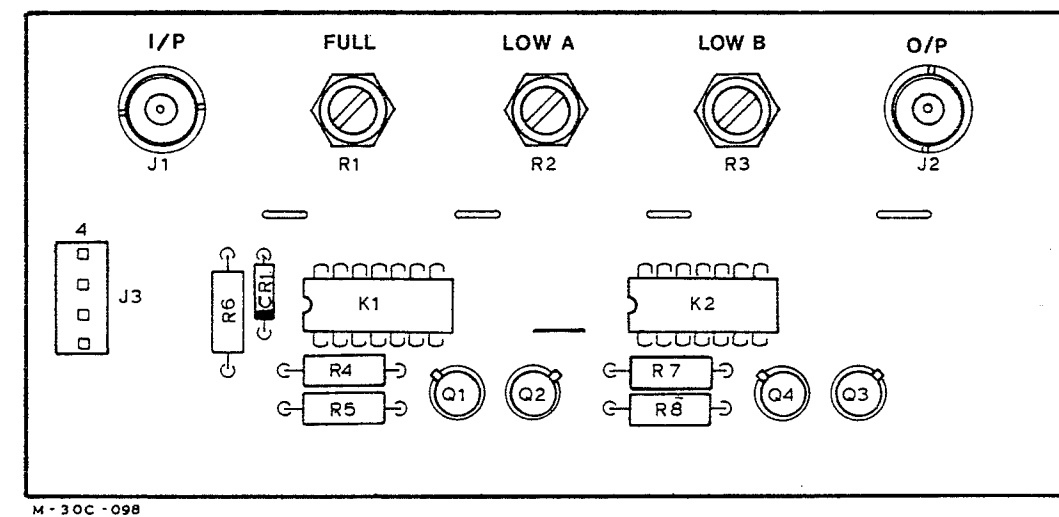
Assembly Detail - NAPC10 Rf Monitor Pcb
